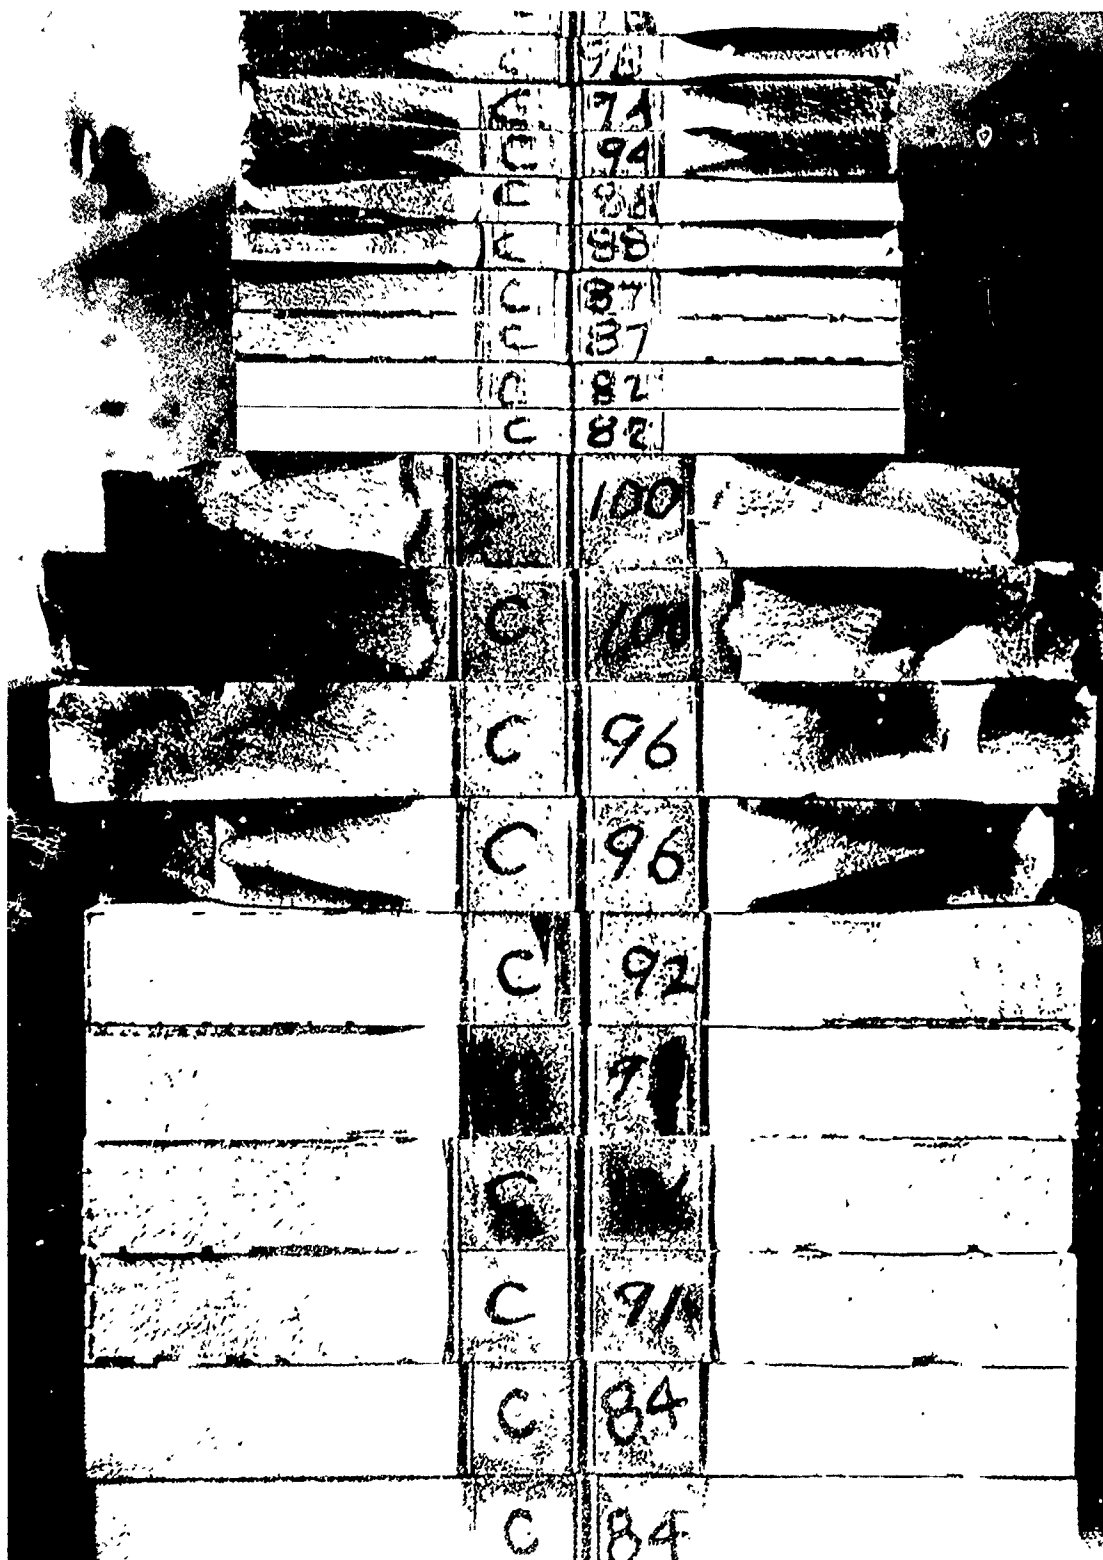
CENTER NOTCH PANEL FRACTURE FACES OF AM 355
